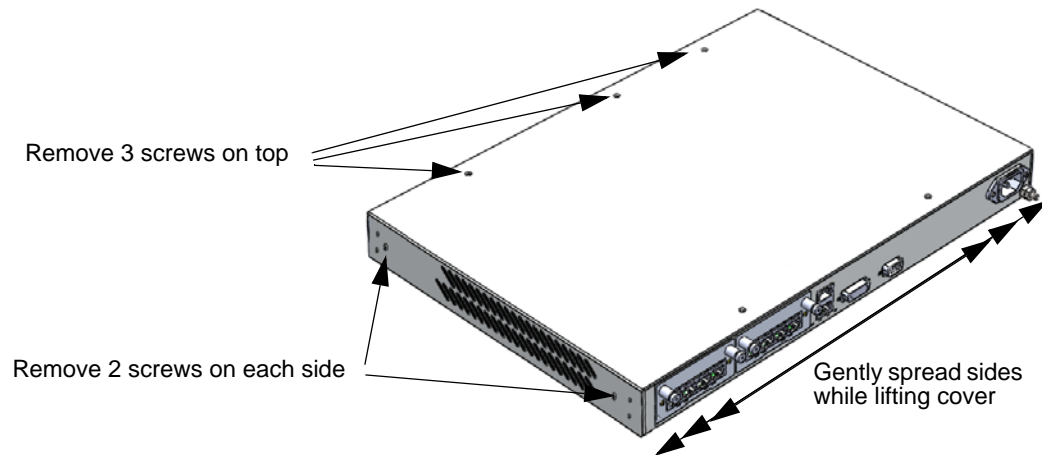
Removing the Cover from the SDM-9120 Chassis
